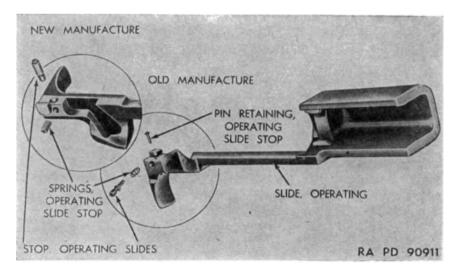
Operating slide group carbines, cal. .30, Ml and M1A1.
